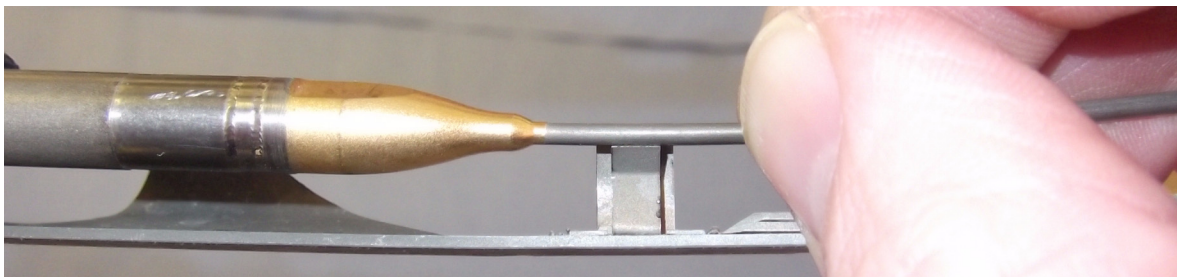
The Sensor Assembly and clip fitted to the Sensor Head
